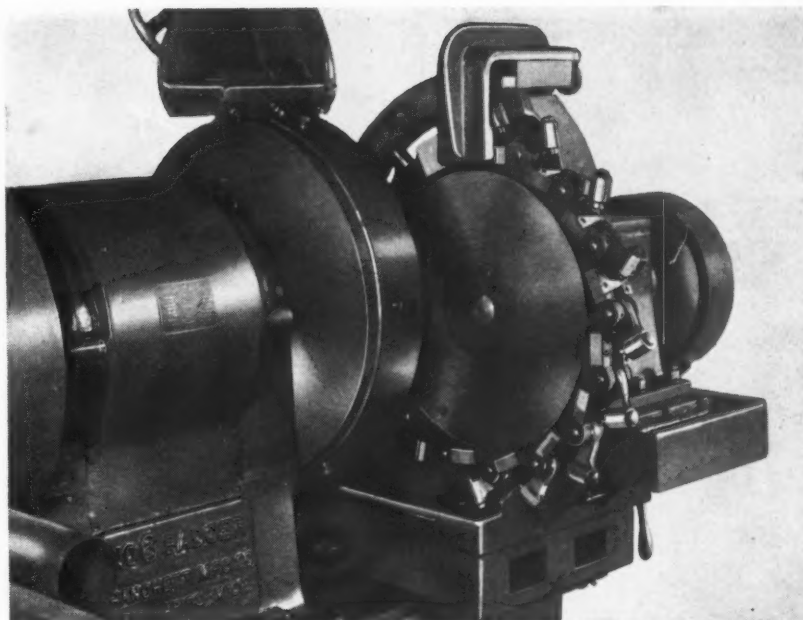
Simple "Gun Type" Sliding Fixture for Grinding Bicycle Sprockets Preparatory to Plating
